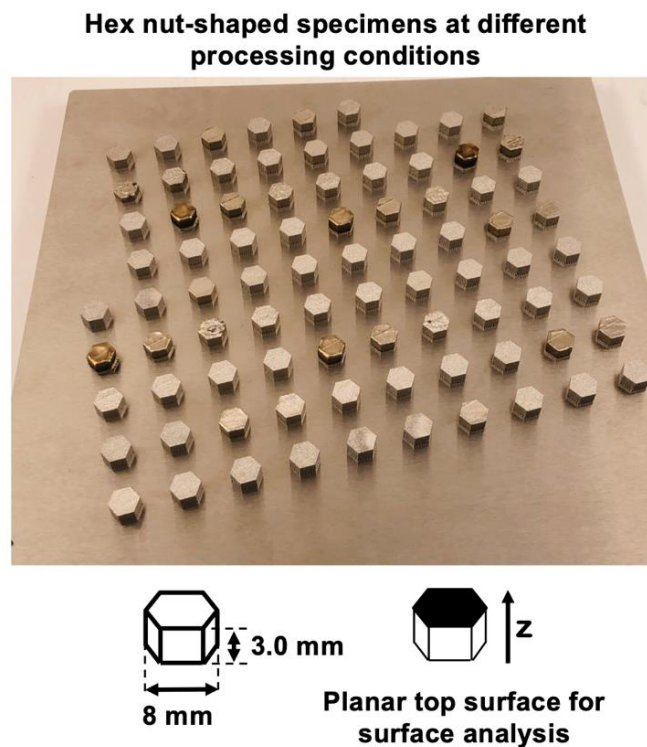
High-throughput (HT) fabrication of additively manufactured 316L stainless steel samples. Surface measurements were performed on the top as-fabricated surface of these hex nut-shaped specimens.
